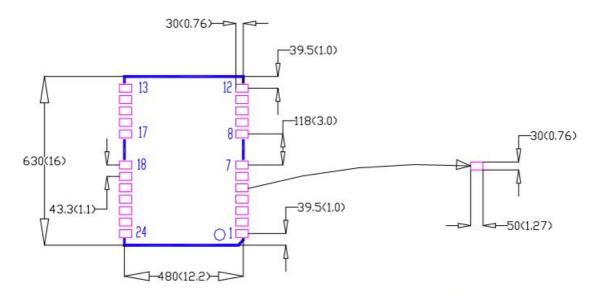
UM220-INS Series Modules Recommended PCB Packaging (unit: mil, in brackets: mm)
